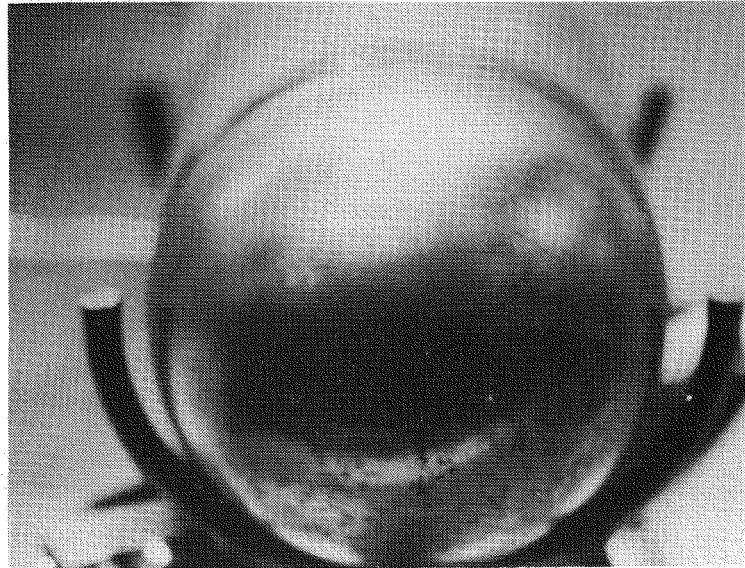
Fractured heat shield resulting from faulty assembly of capsule SN 341/358.
